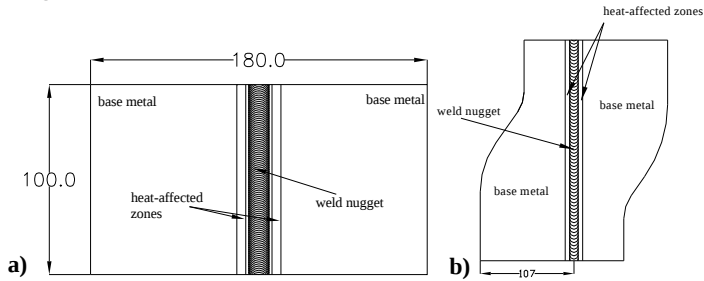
Drawings of the friction stir welded blanks used in the simulations of the LDH test (5a) and S-rail problem (5b).
